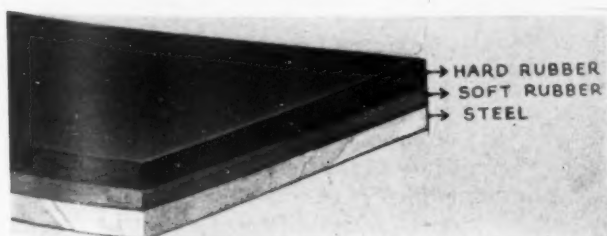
Drawing illustrating patented method of bonding hard rubber to steel using an intermediate coating of soft rubber.
